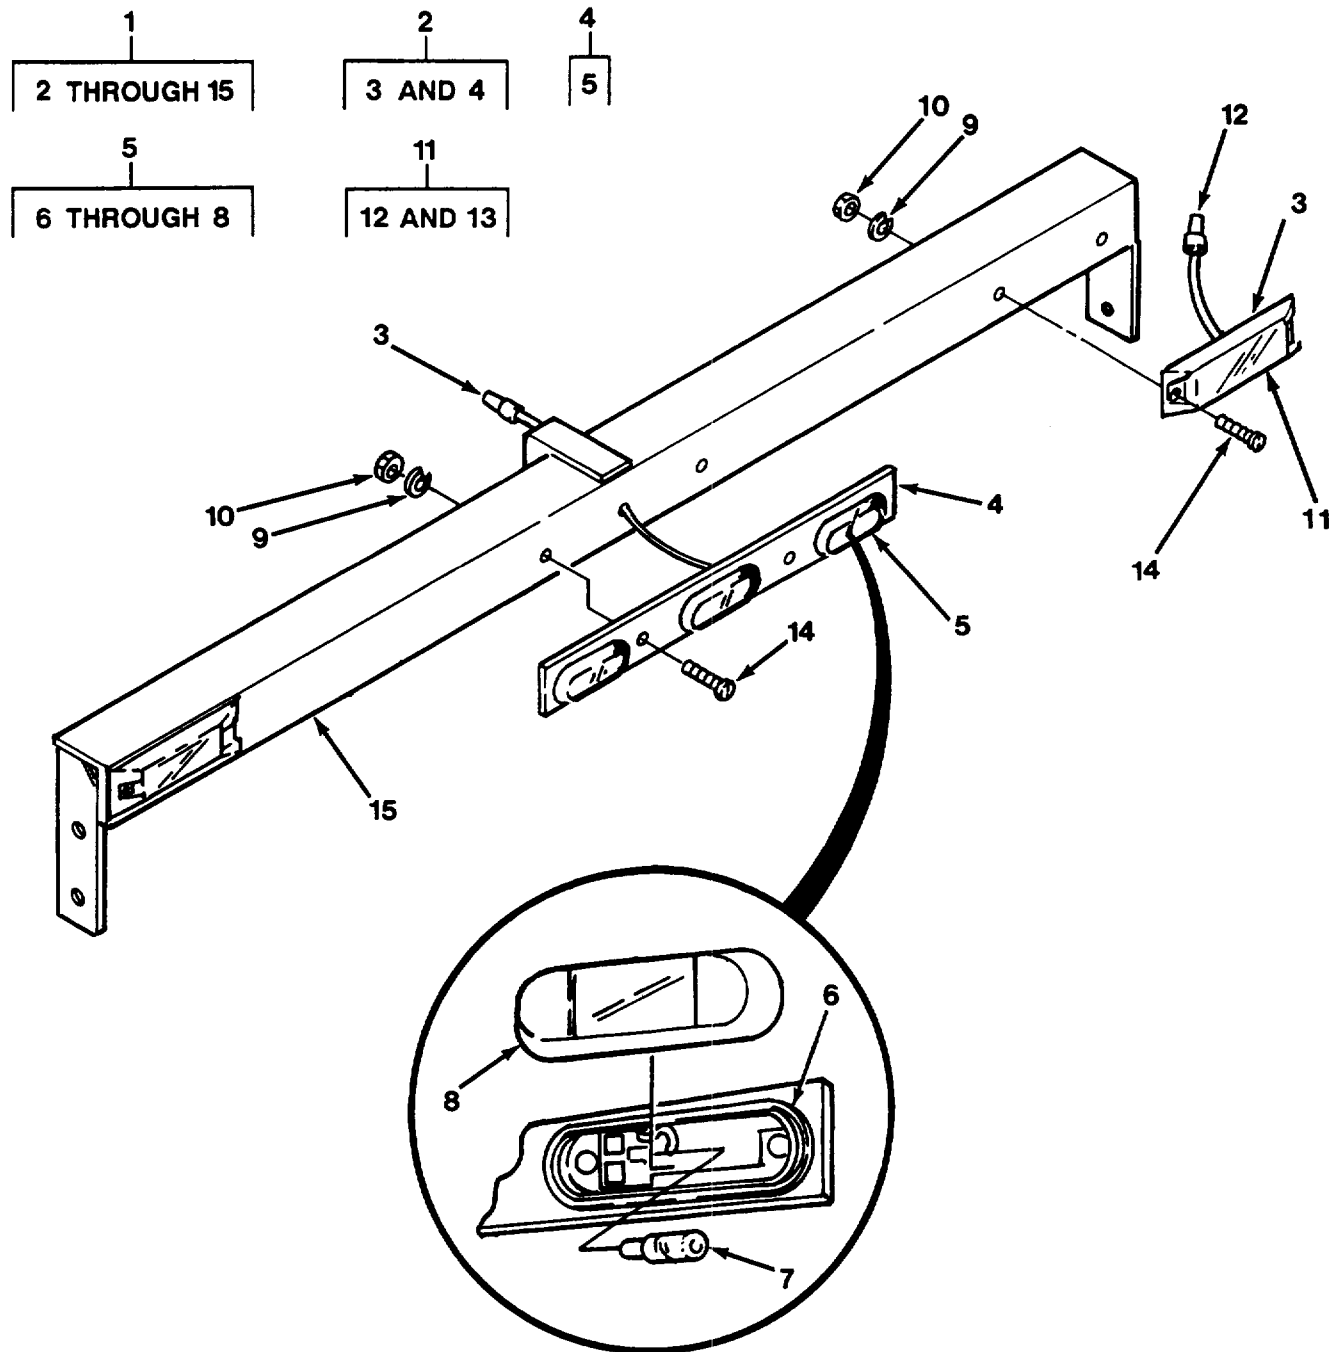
CLEARANCE LIGHT BAR ASSEMBLY
